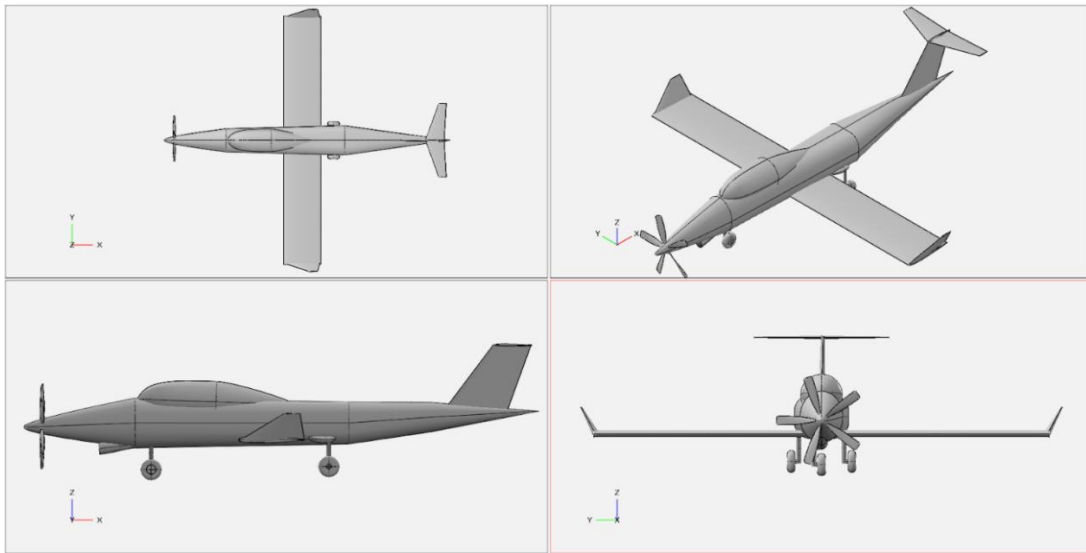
The technical design team’s preliminary light attack aircraft design with low-set wings, landing gear, and turboprop engine.
